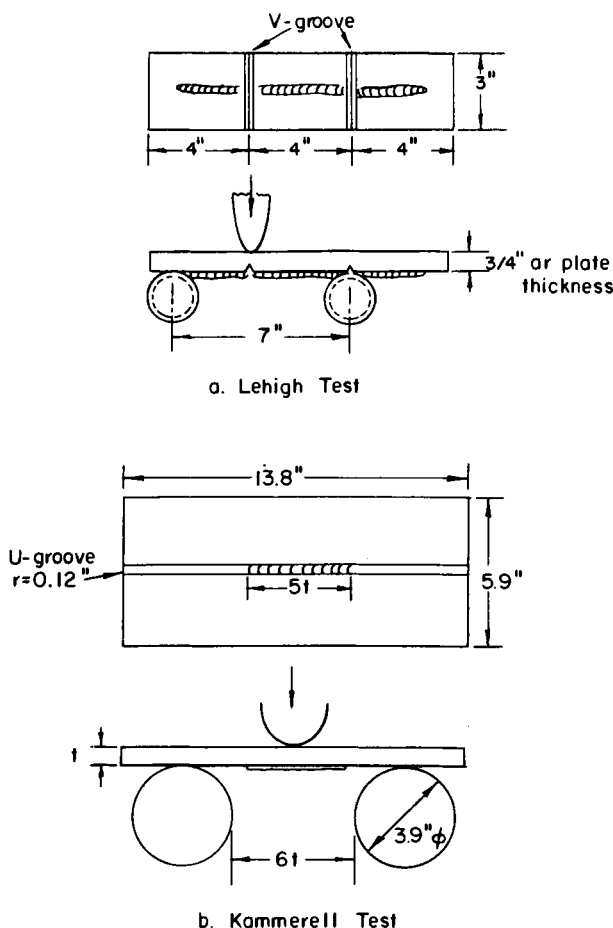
Bend tests on welded specimens. Dimensions of the Kommerell test change depending upon the plate thickness. Dimensions shown in this figure are for plates less than 1 in. (25 mm) thick.
